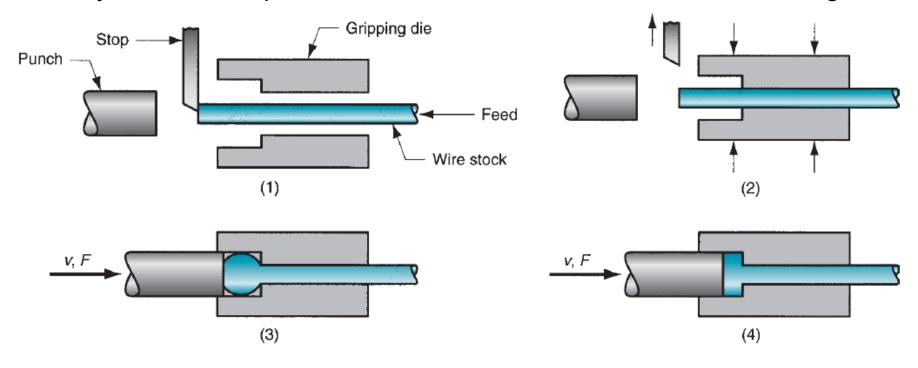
An upset forging operation to form a head on a bolt. (1) wire stock is fed to the stop; (2) gripping dies close on the stock and the stop is retracted; (3) punch moves forward; and (4) bottoms to form the head.
